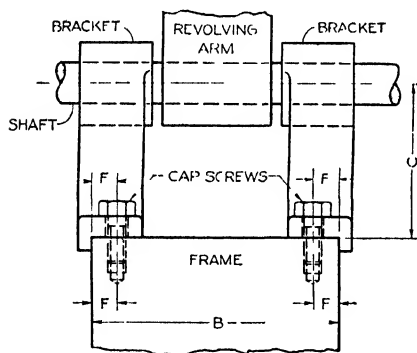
BRACKET ASSEMBLY — DOUBLE BRACKET
